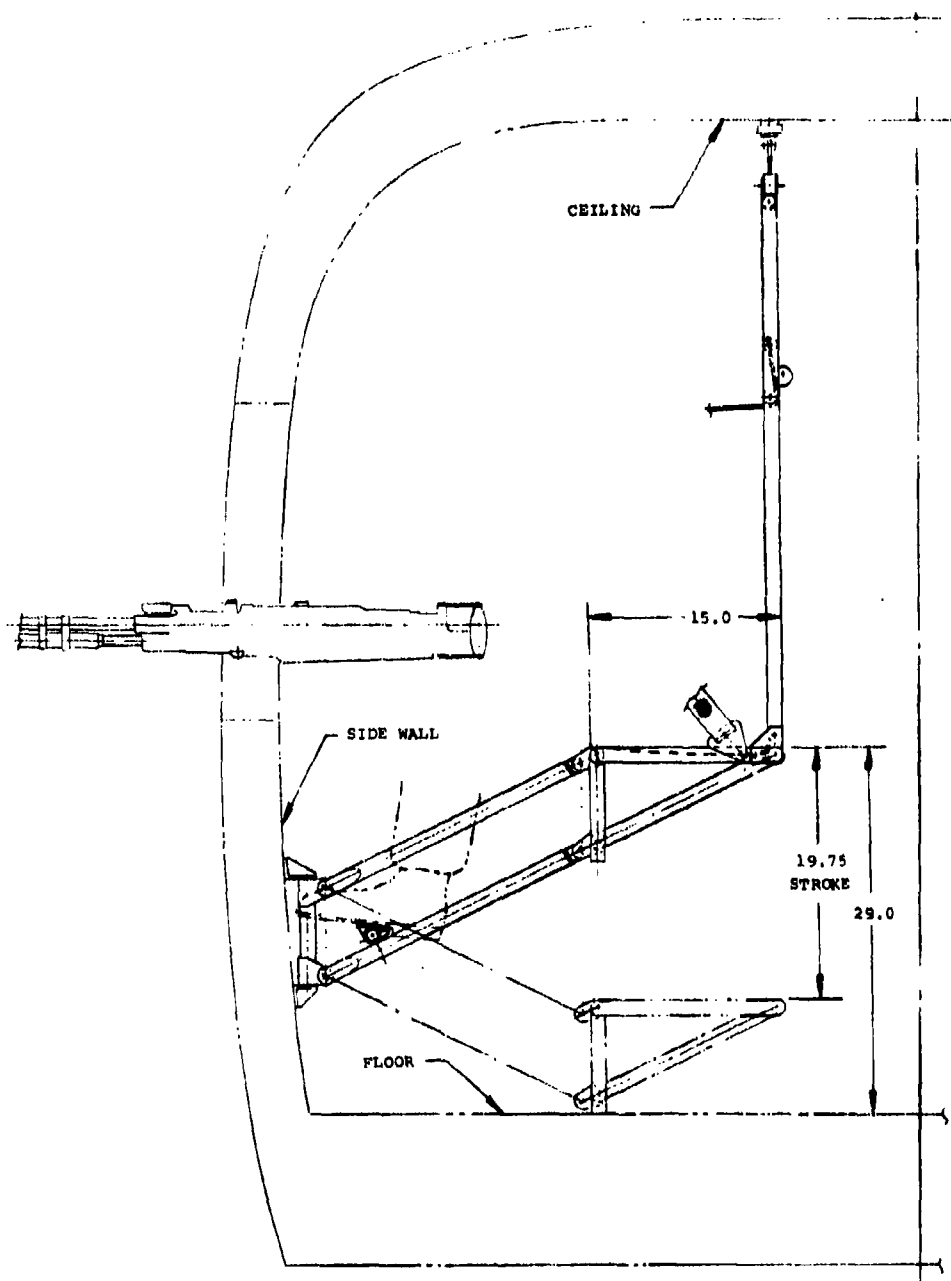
Concept D - Ceiling- and Wall-Mounted Fixed Unarmored Gunner's Seat (Sheet 1 of 2).
